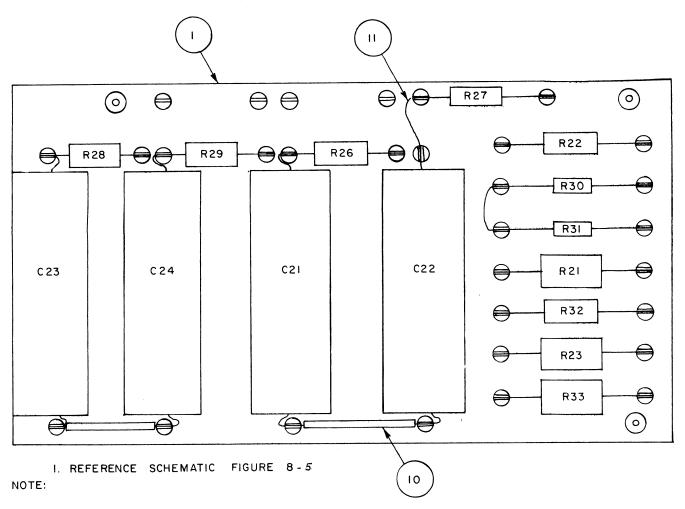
Board Assembly Power Supply 1C 3527 Serial No. 1 thru 240
